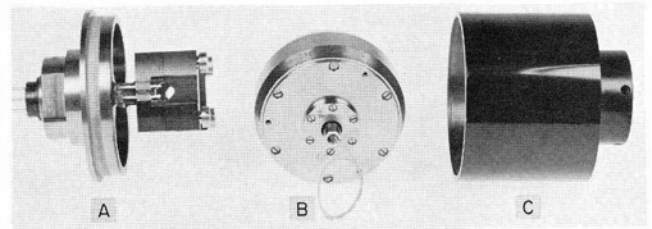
Saturn AB5-K8 Inner Cylinder Assembly
